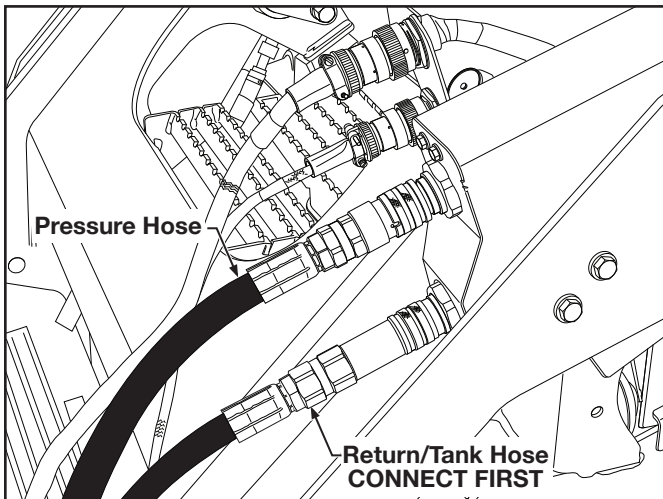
Hydraulic Hose Connections to Skid Steer
